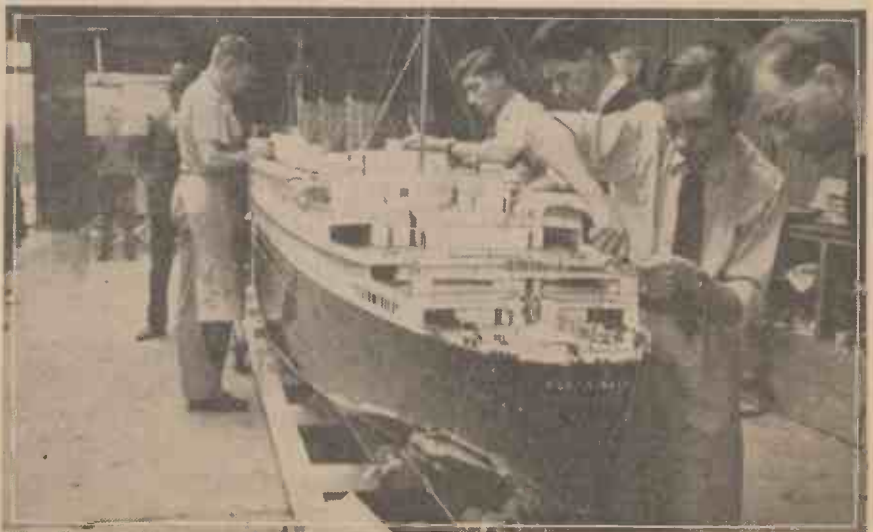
A stern view of the boat showing skilled craftsmen adding the final fittings.
